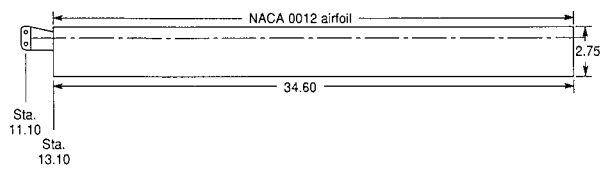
Geometry of Froude-scaled model rotor blades. All dimensions are in inches.
